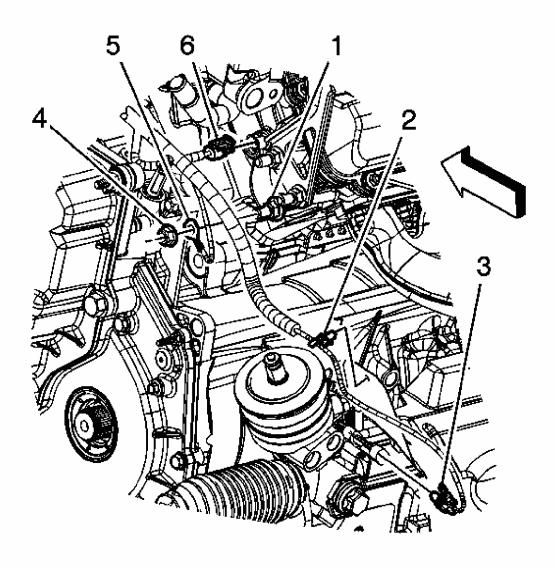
Locating Engine Harness Electrical Connectors Courtesy of GENERAL MOTORS CORP.
